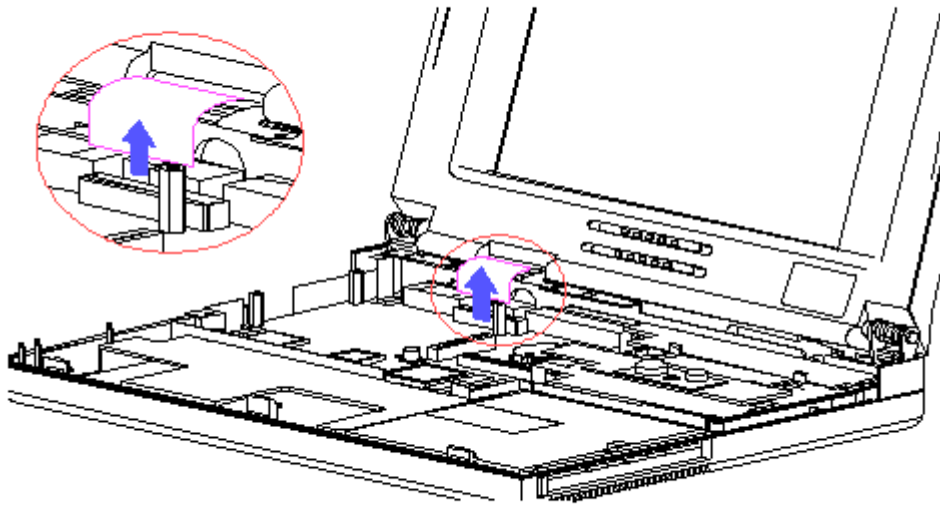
Removing the Display Cable (Data) from the Processor Board
